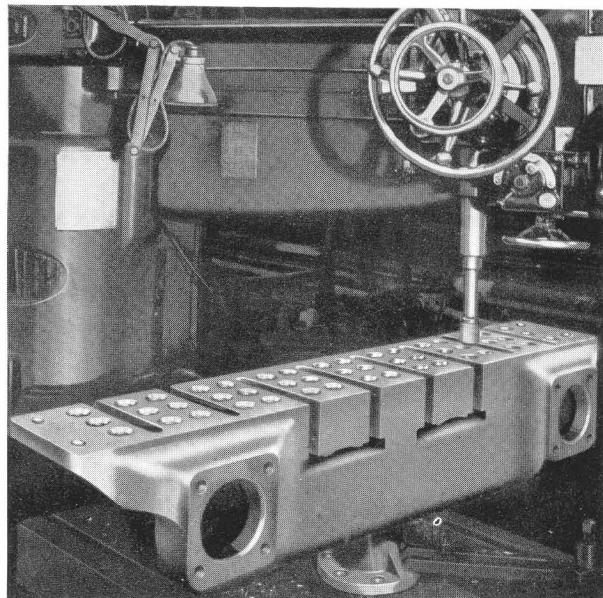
Header cone seats being machined after the element holes have been jig drilled. In the special combined reaming and counter-sinking tool the setting of an adjustable sleeve ensures that all element holes and seats are identical. (From photographs taken in the works of The Superheater Company at Trafford Park, Manchester.)
